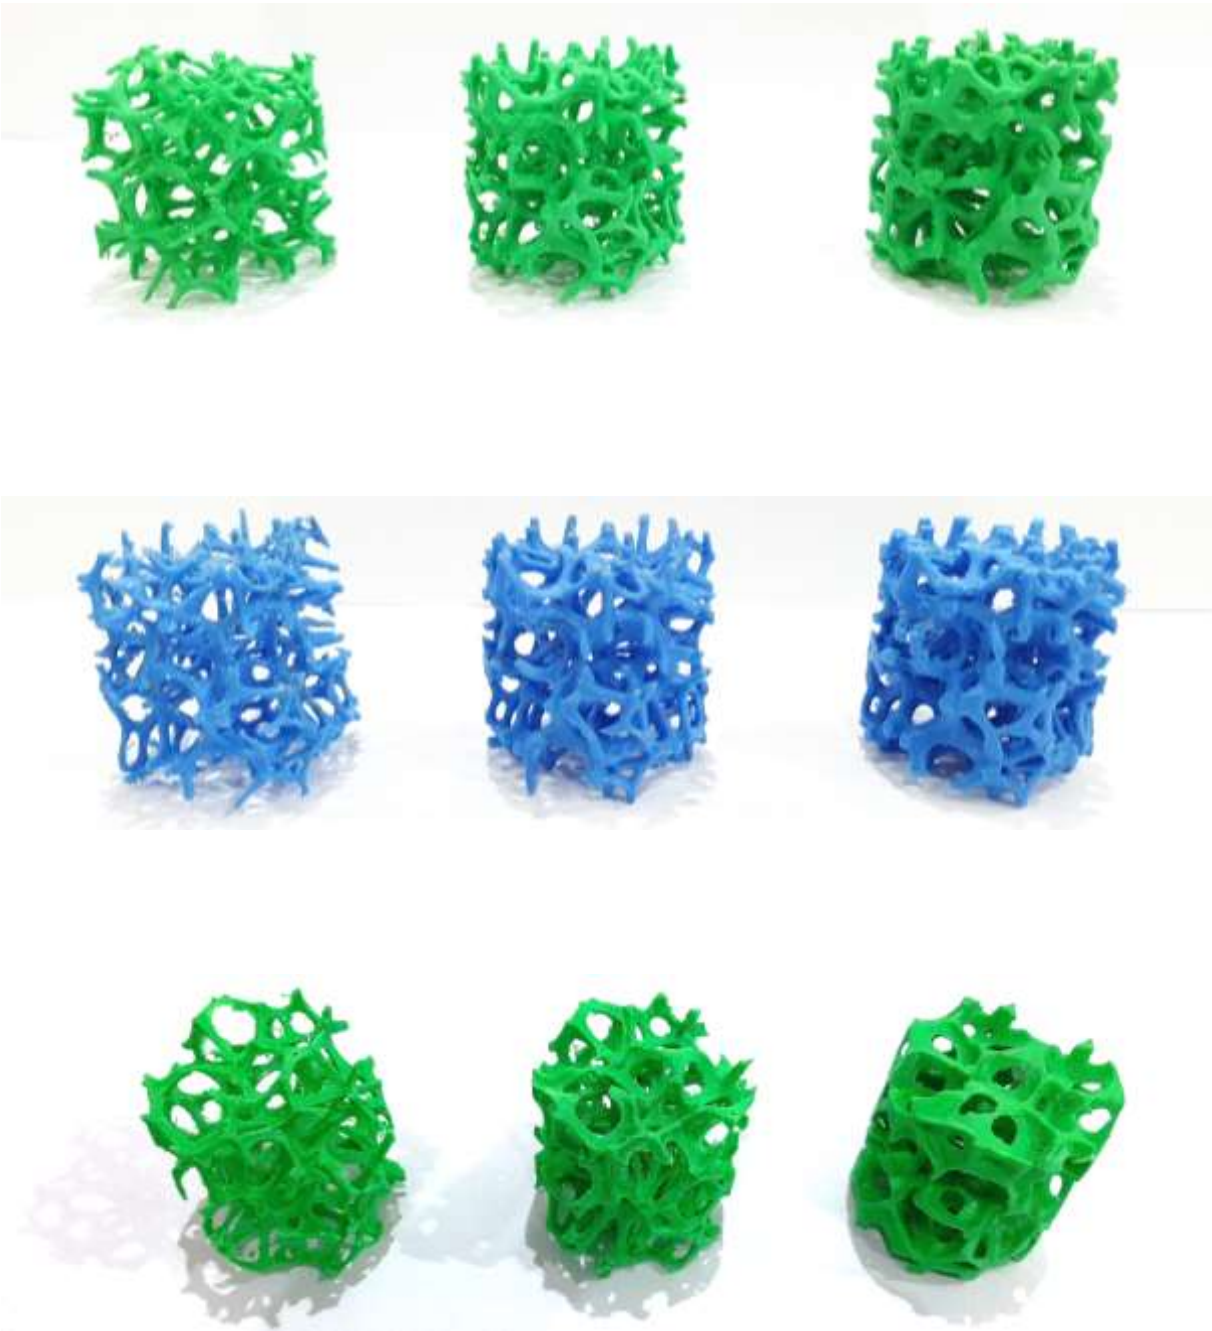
Example of 3D printed simples using geeetech A10 3D-printer
